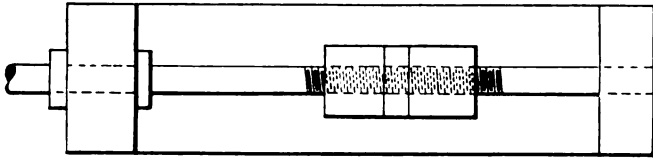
LEAD SCREW NUT LOCATED BY CROSS KEY
